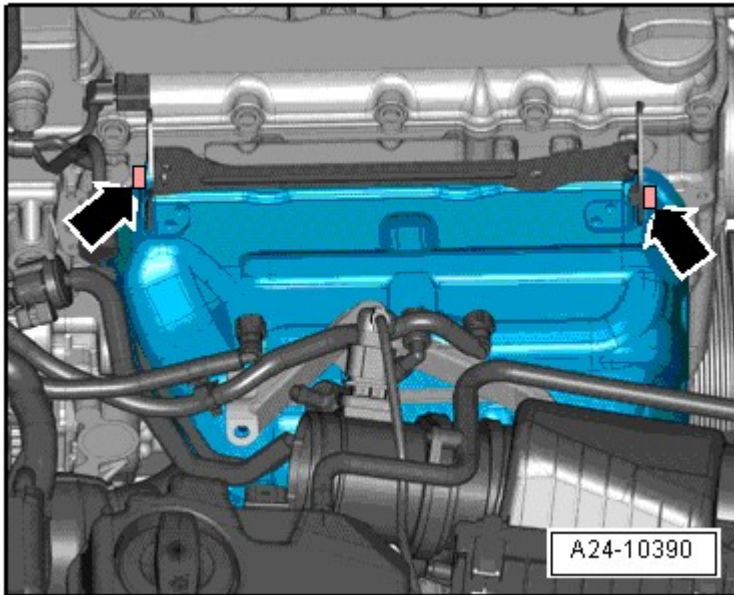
Identifying Bolts -Arrows- And Heat Shield
